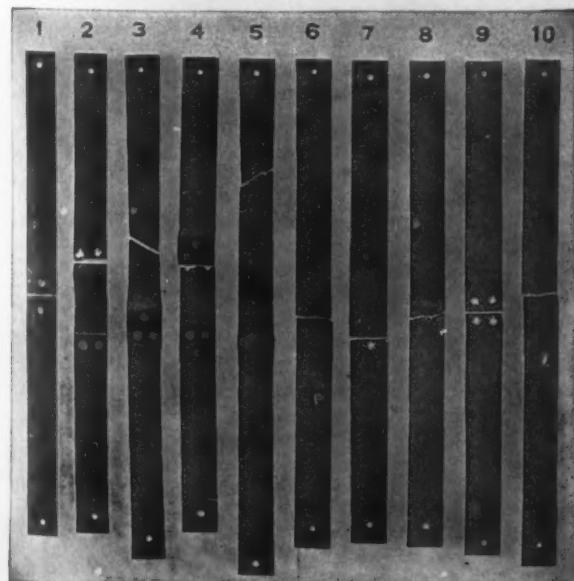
Convincing Tests of Electric Welding.
